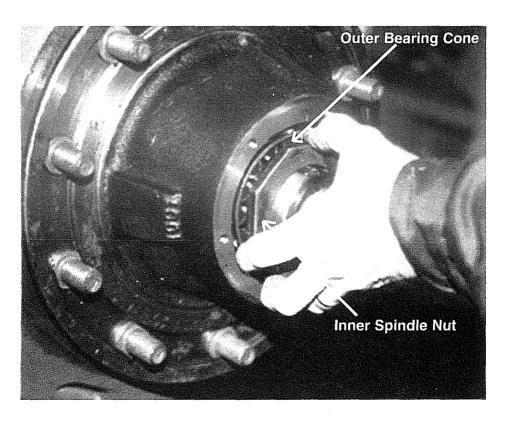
Installation of outer bearing cone and inner spindle nut.
